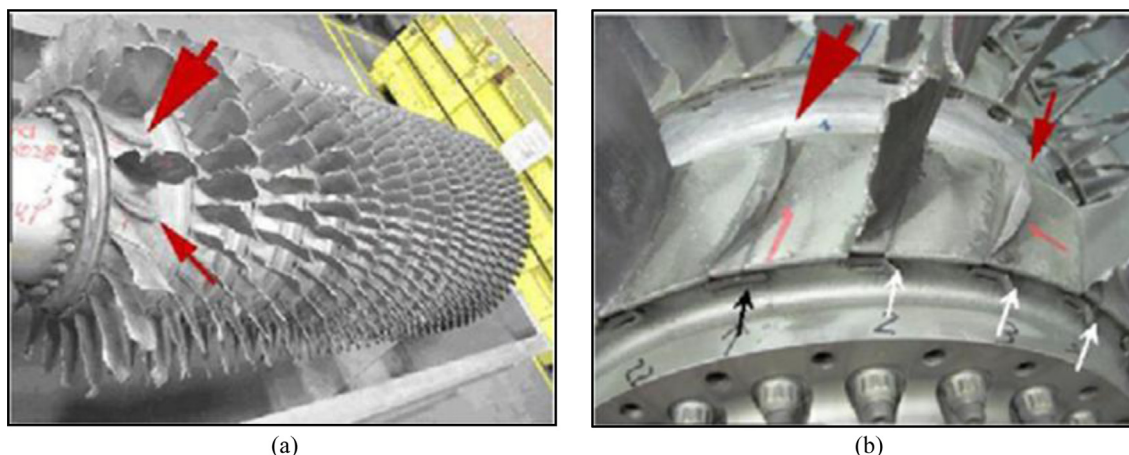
Installation of the compressor rotor displaying broken blades: (a) overall view of the damaged rotor installation and (b) overall view of the failed 1st stage compressor blades [16].
